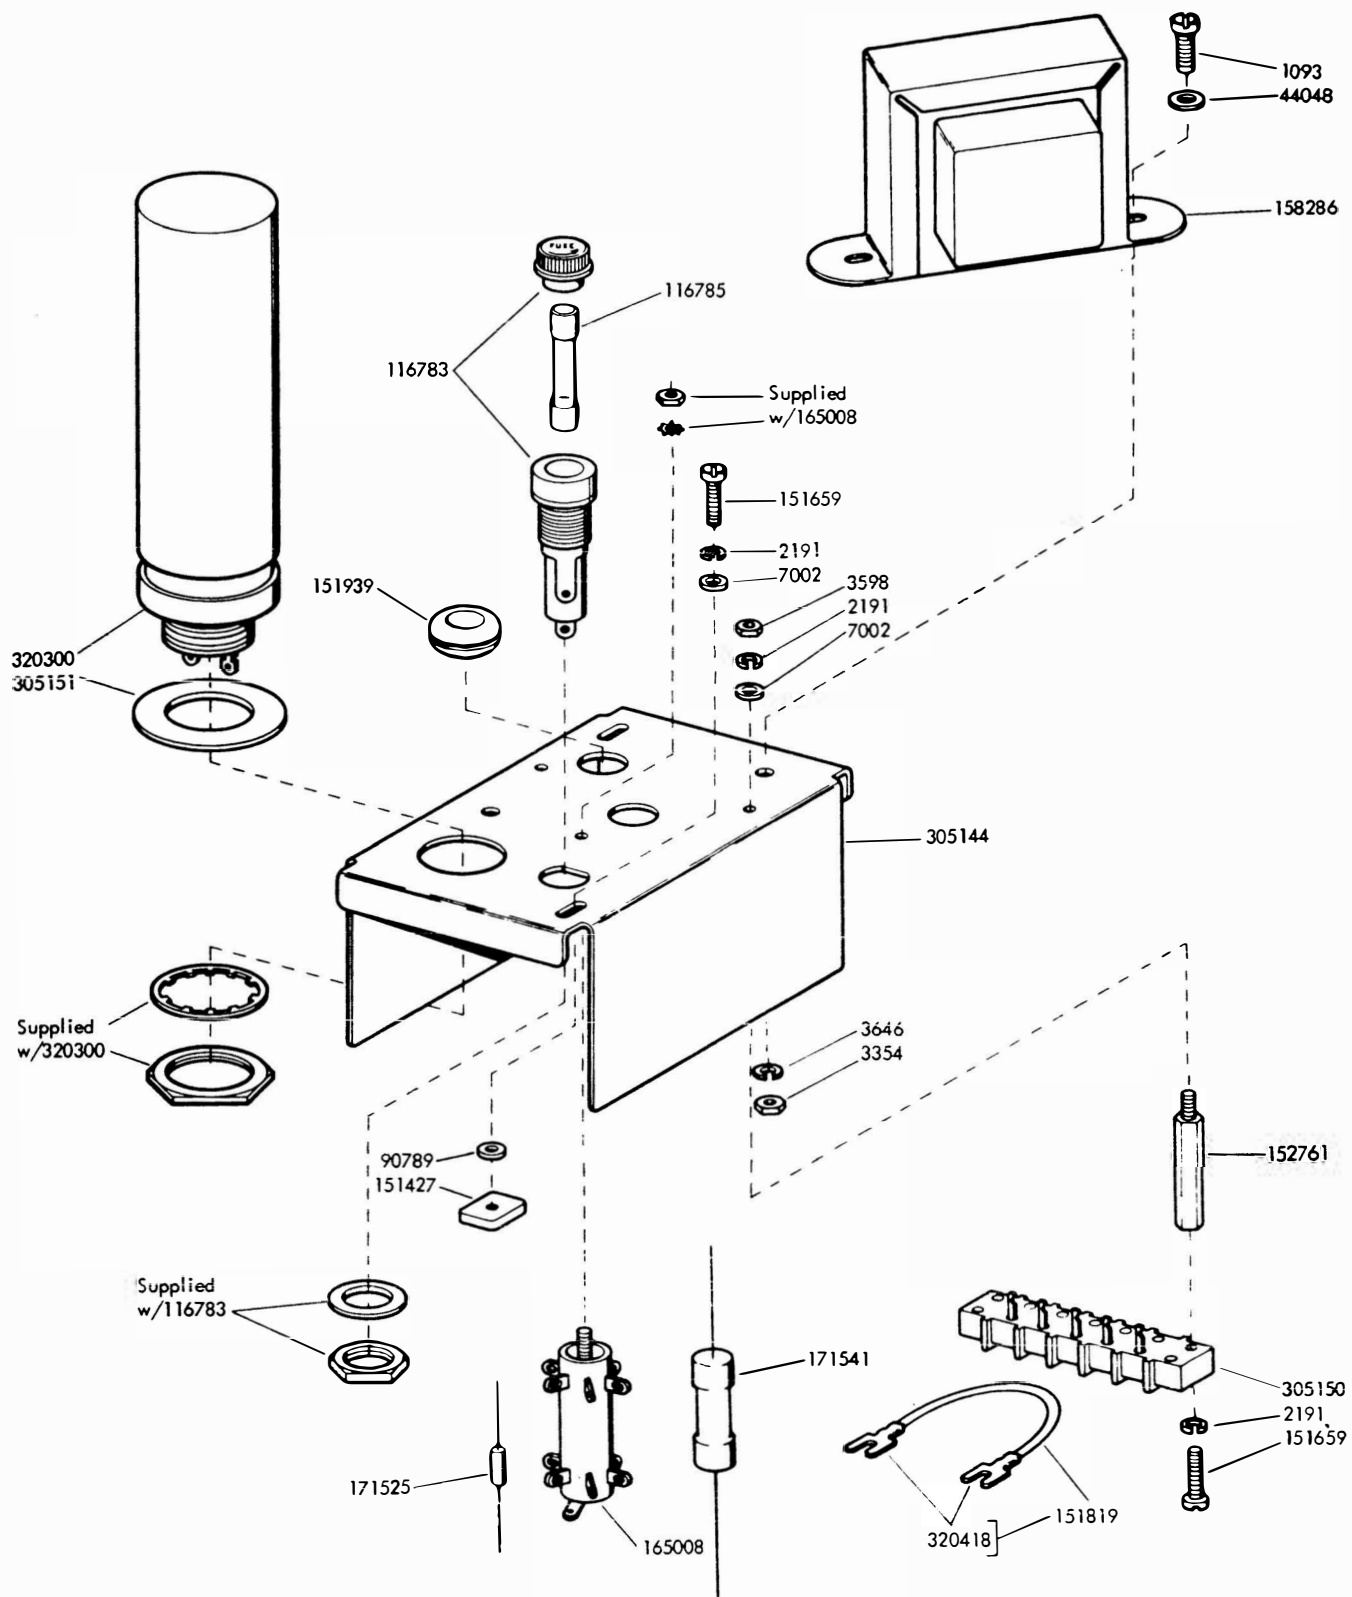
305143 RECTIFIER ASSEMBLY
